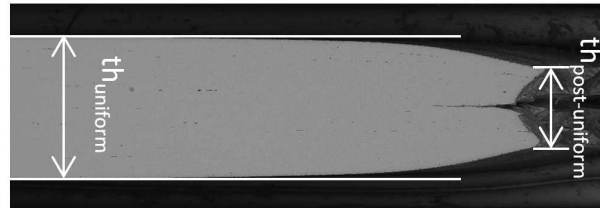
Cross section of the fractured tensile specimen (schematic) and position of MP
